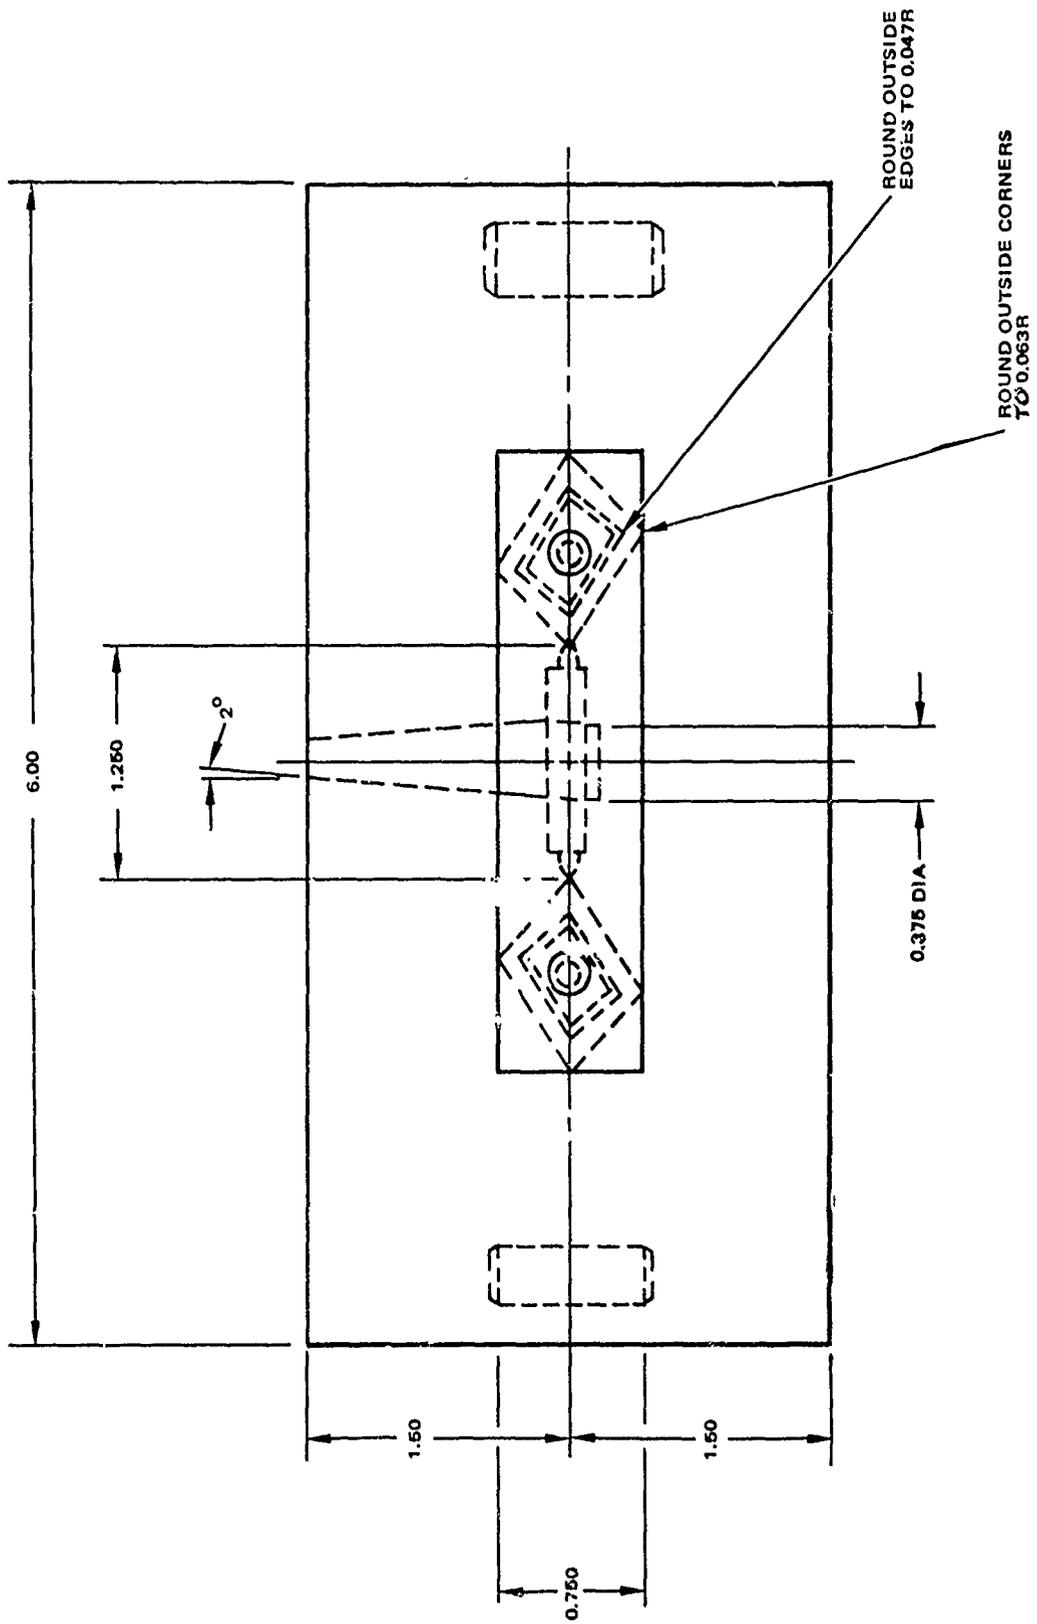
Example of a transfer mold for making bobbins (dimensions are in inches) (sheet 2 of 2).
